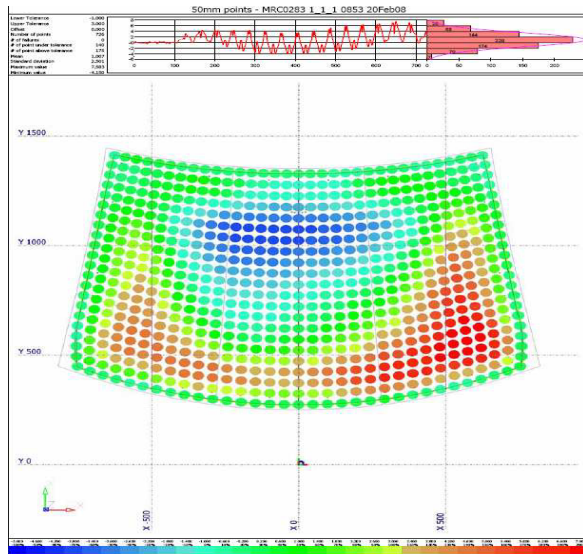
The errormap of a windshield, developed by traditional CMM technique
